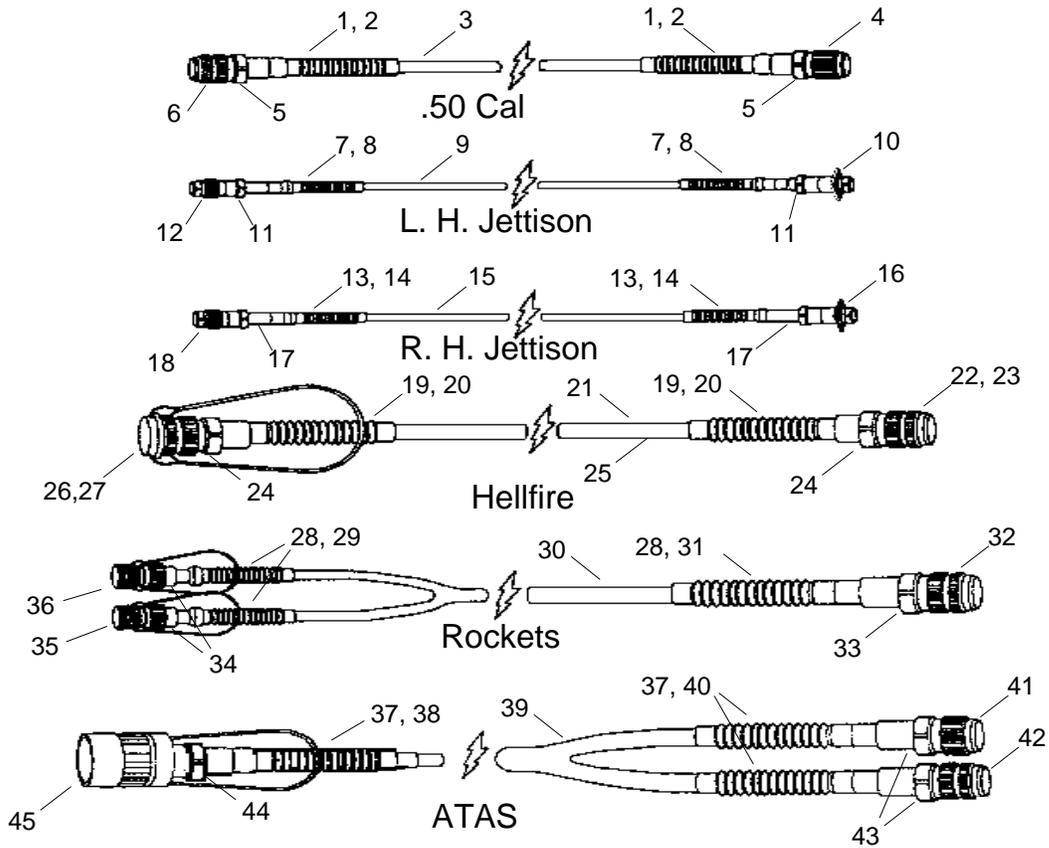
Umbilical Harness Assemblies .50 cal. MG (406-075-192-107), Left Hand Jettison (406-075-192-109), Right Hand Jettison (406-75-192-111), Hellfire Missile (406-075-192-101), 2.75-Inch Rockets (406-075-192-103), and Air-to-Air Stinger (406-075-192-105)
